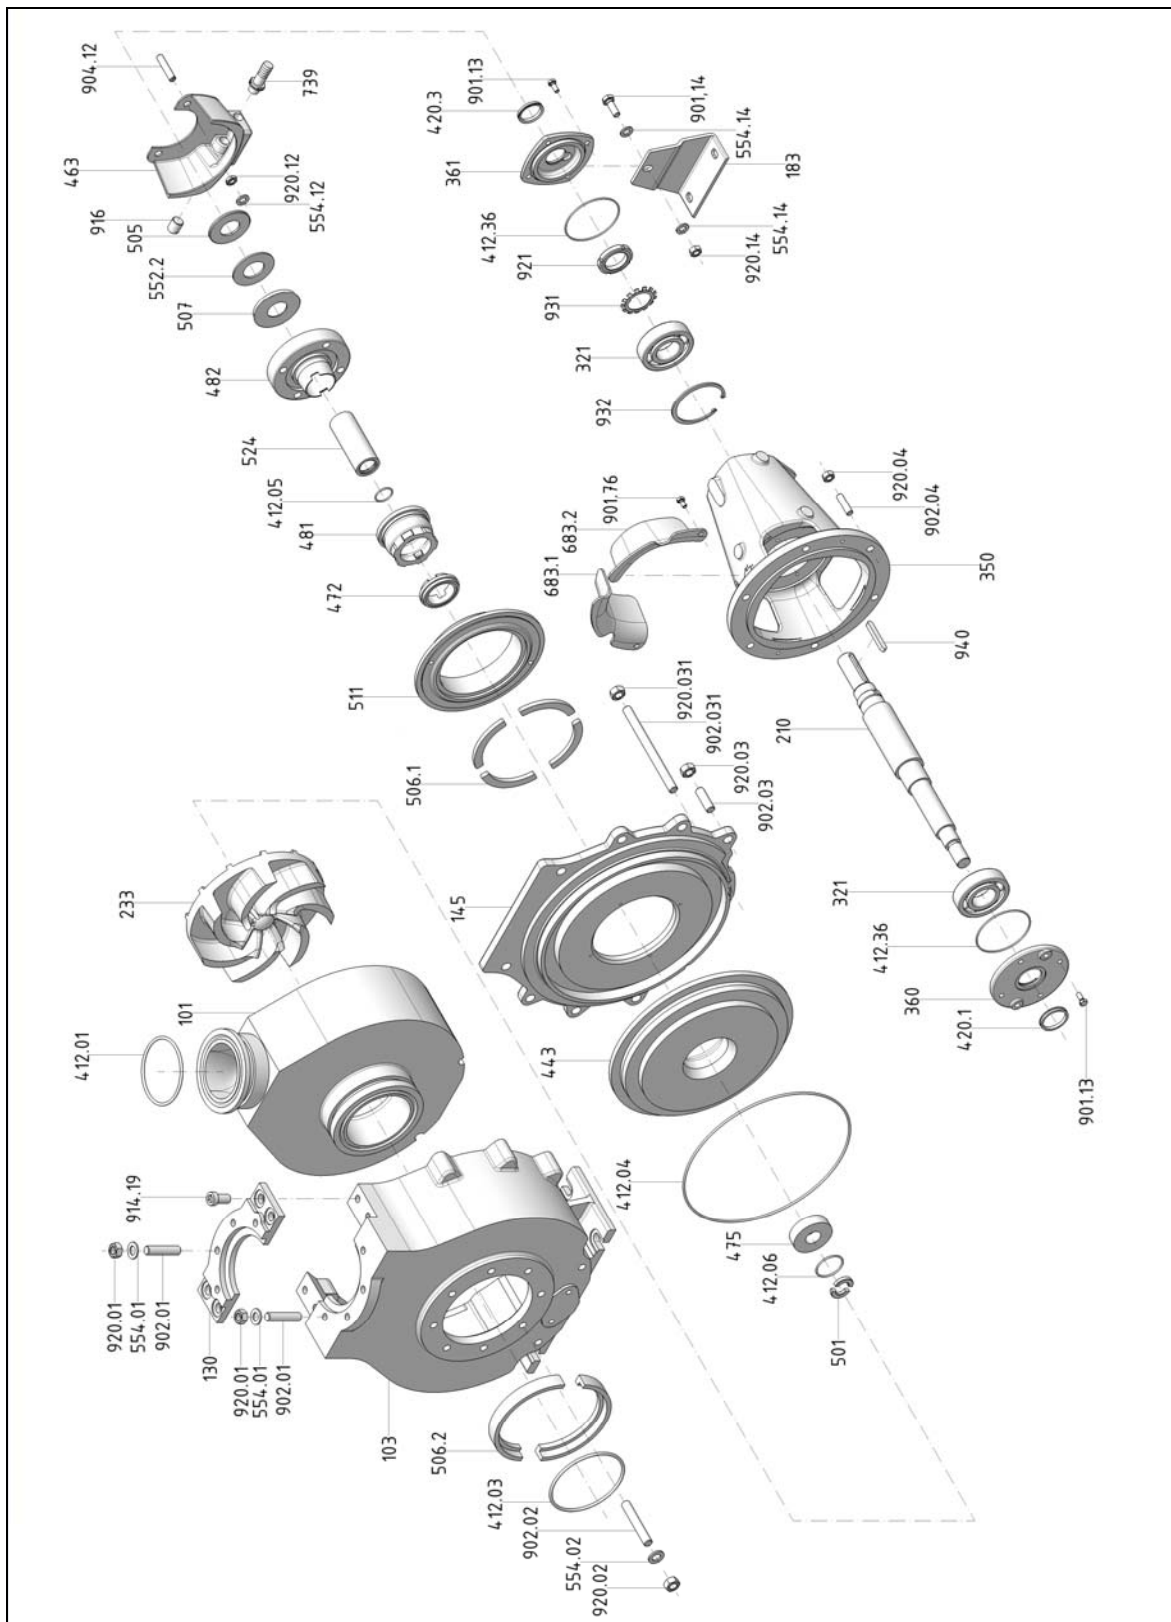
Exploded view of the individual parts of the pump with single WERNERT-elastomere-bellows-mechanical seal and semi-open impeller.
